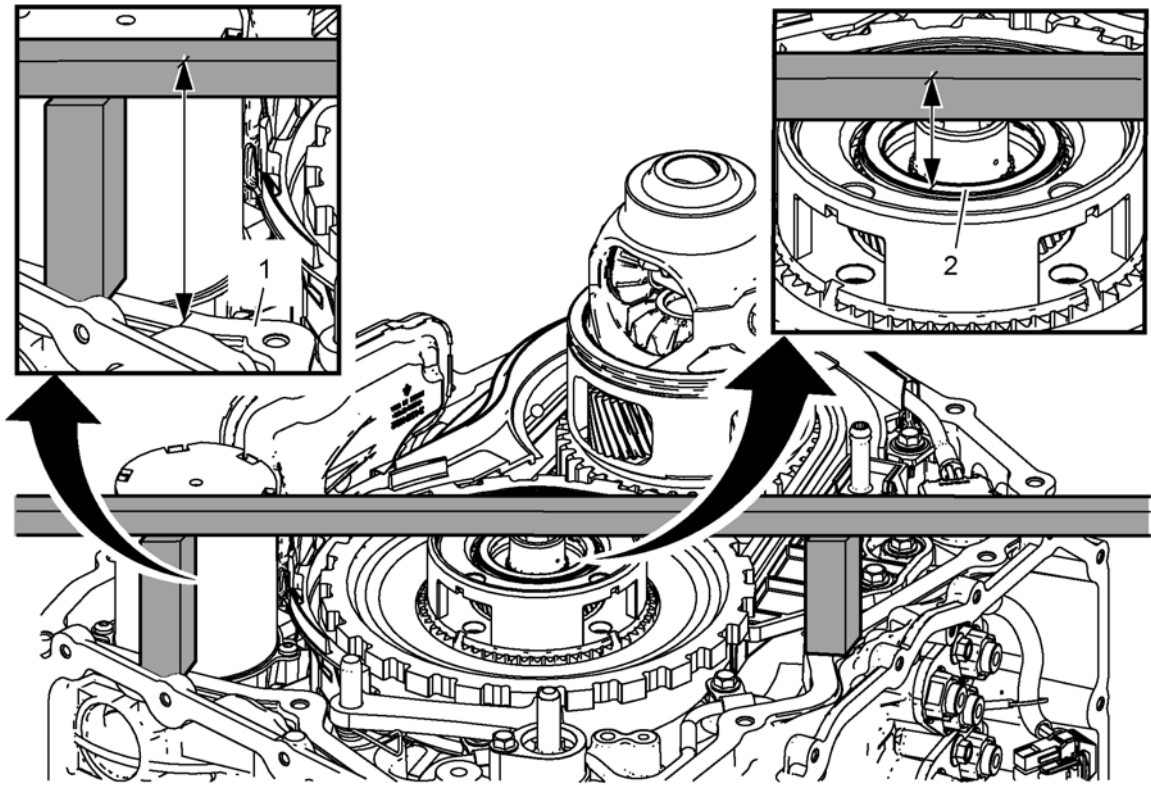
Automatic Transmission Torque Dampener Thrust Washer Measurement (Step 1)
